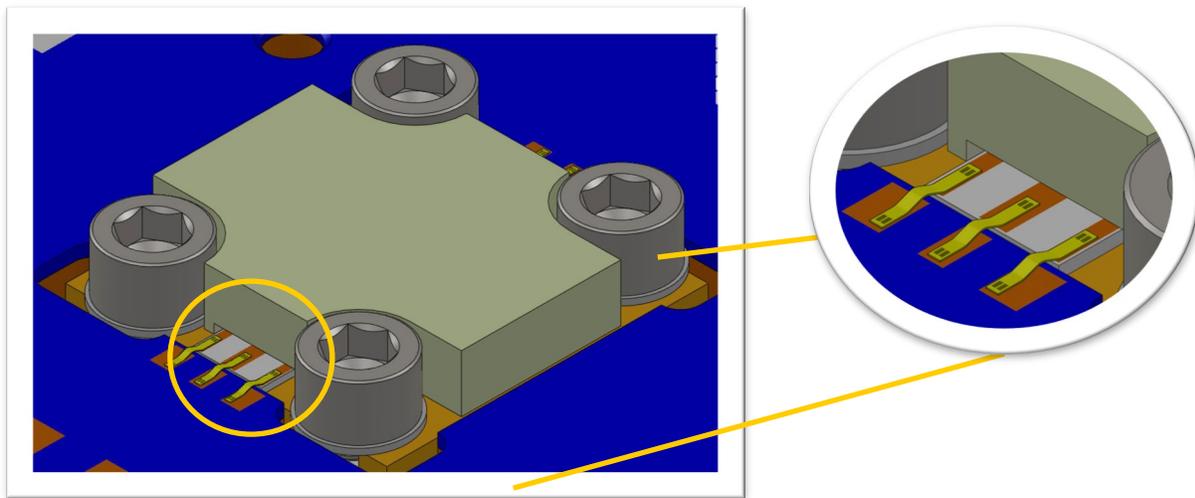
Illustration of CMPA2560025F MMIC Power Amplifier Gap Welded at Next Level Assembly
